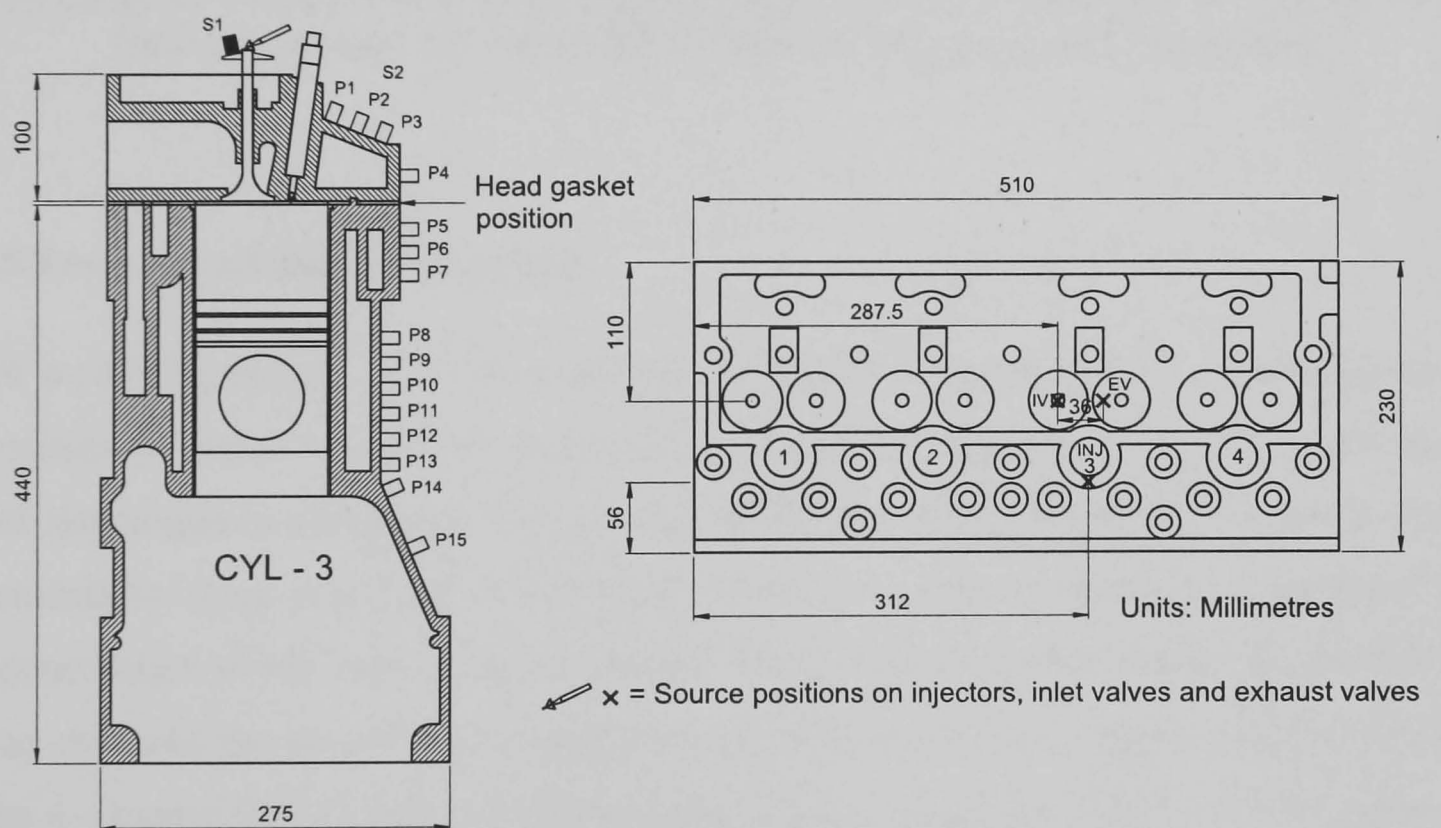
Drawings, sections and dimensions of the cylinder head and the cylinder block of four-stroke HSDI diesel engine (disassembled engine) showing sensor positions (P1 – P15) on the vertical sensor array around injector no. 3 and various source positions on the injector body, the top of the IV stem and around the EV spring base.
